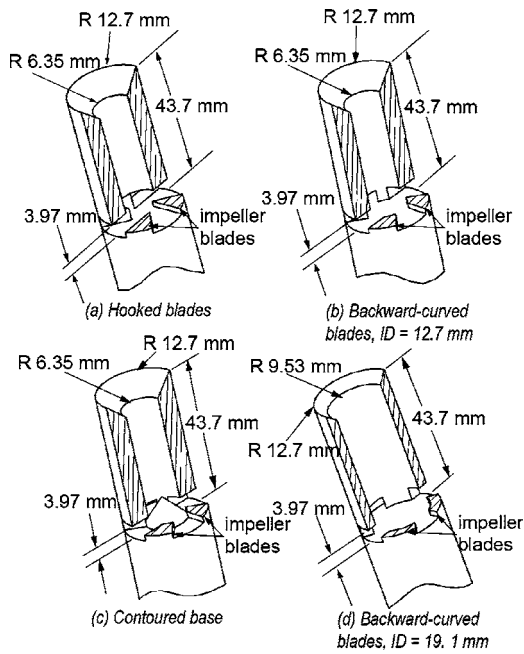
Cutaway view of each impeller design tested, showing the inlet, impeller blades, and outlet holes. Cutaway pieces are cross-hatched.
